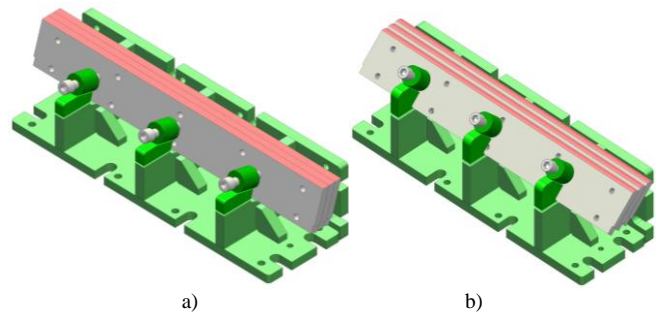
Fixtures for machining chamfers of Blade I and Blade II parts.
